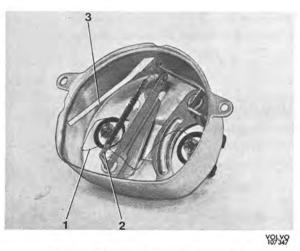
Registering instrument, disassembled 1. Resistance wire 2. Bi-metal spring 3. Pointer
